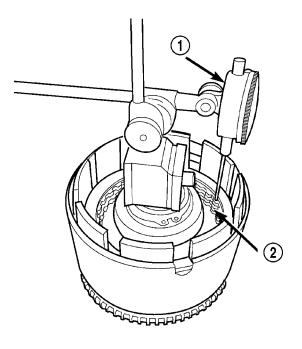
Set Up Dial Indicator to Measure UD Clutch Clearance
